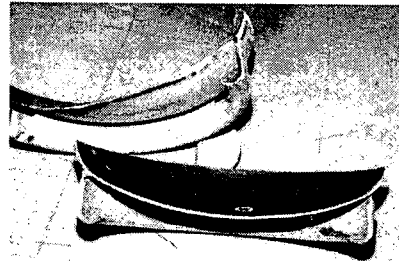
Cross-sectional thickness of T zone of LPG cylinder showing metal loss due to corrosion.
